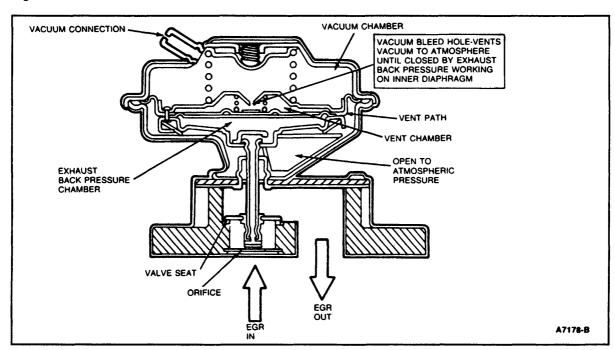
Integral Back Pressure Transducer EGR Valve (9D448)
